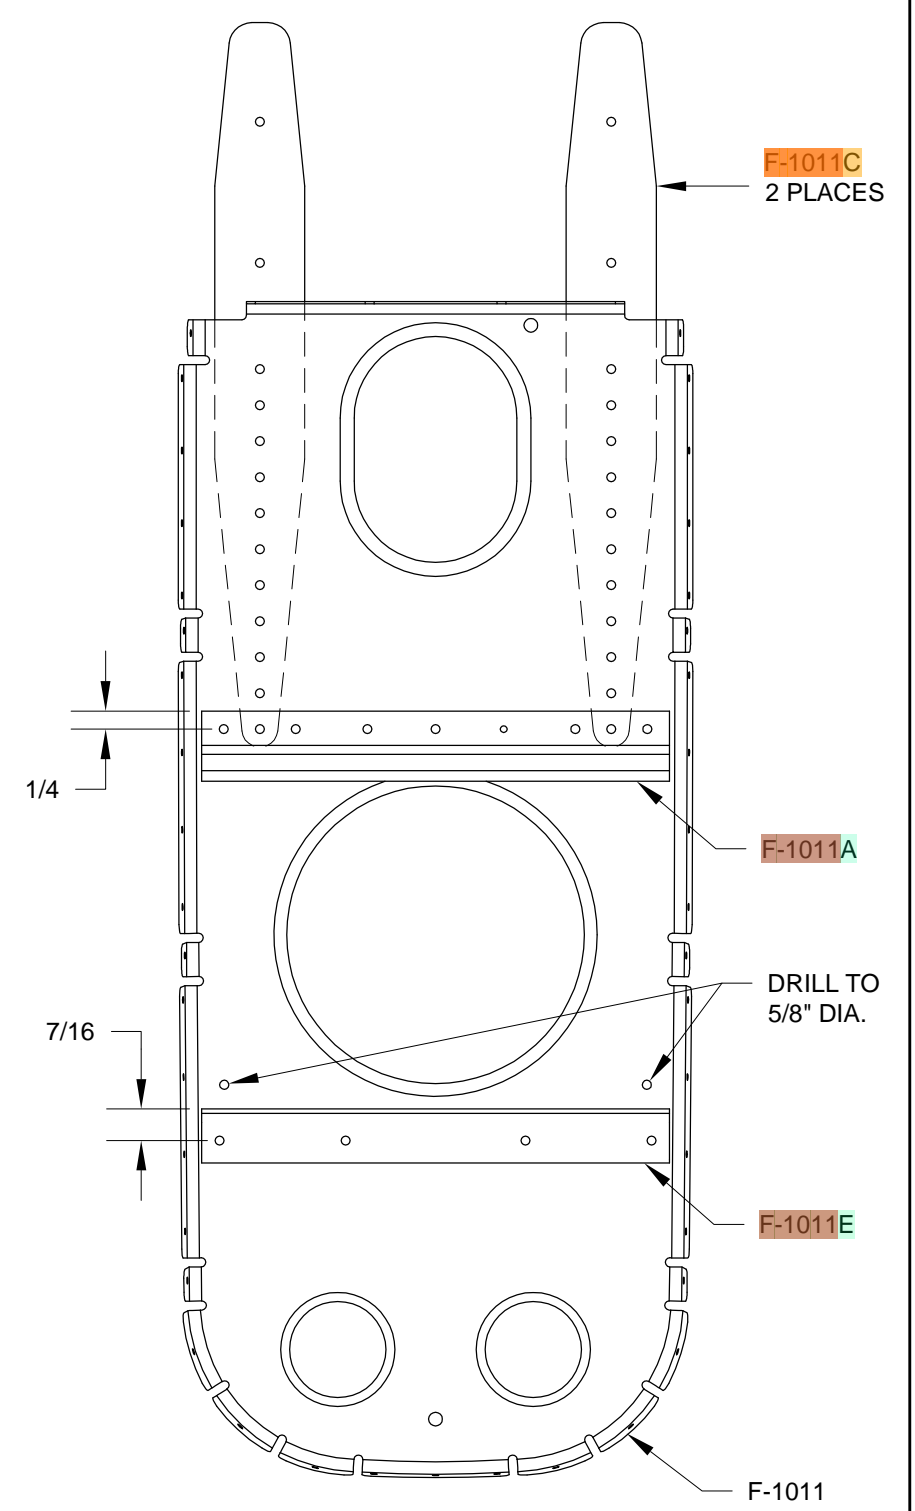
POSITIONING F-1011 BULKHEAD PARTS
